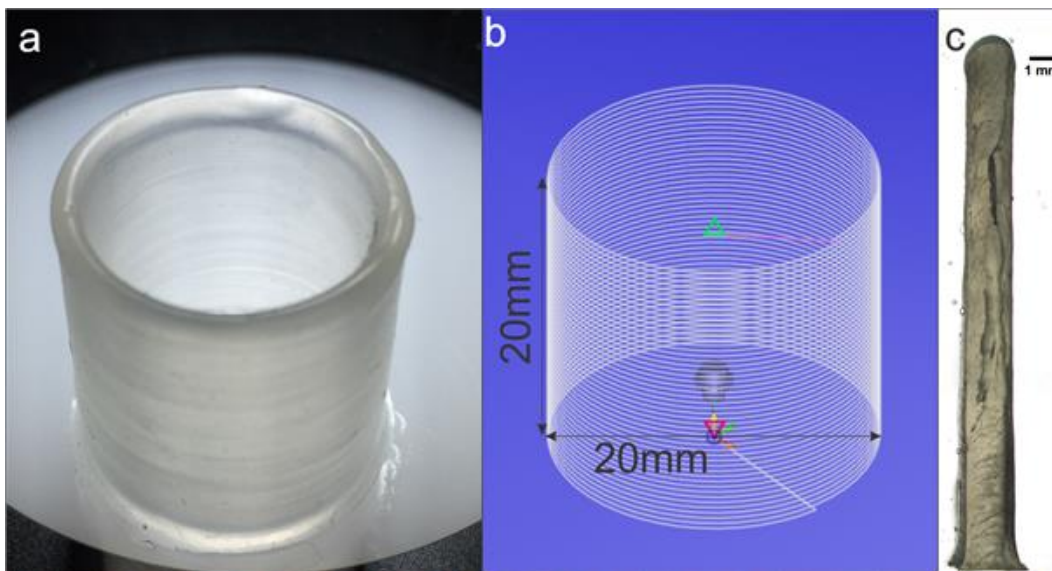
, A 50-layer Silicone cylinder 3D printed using V21H ink. a) The cylinder b) A toolpath for the cylinder with dimension c) Z cross section of the cylinder.
